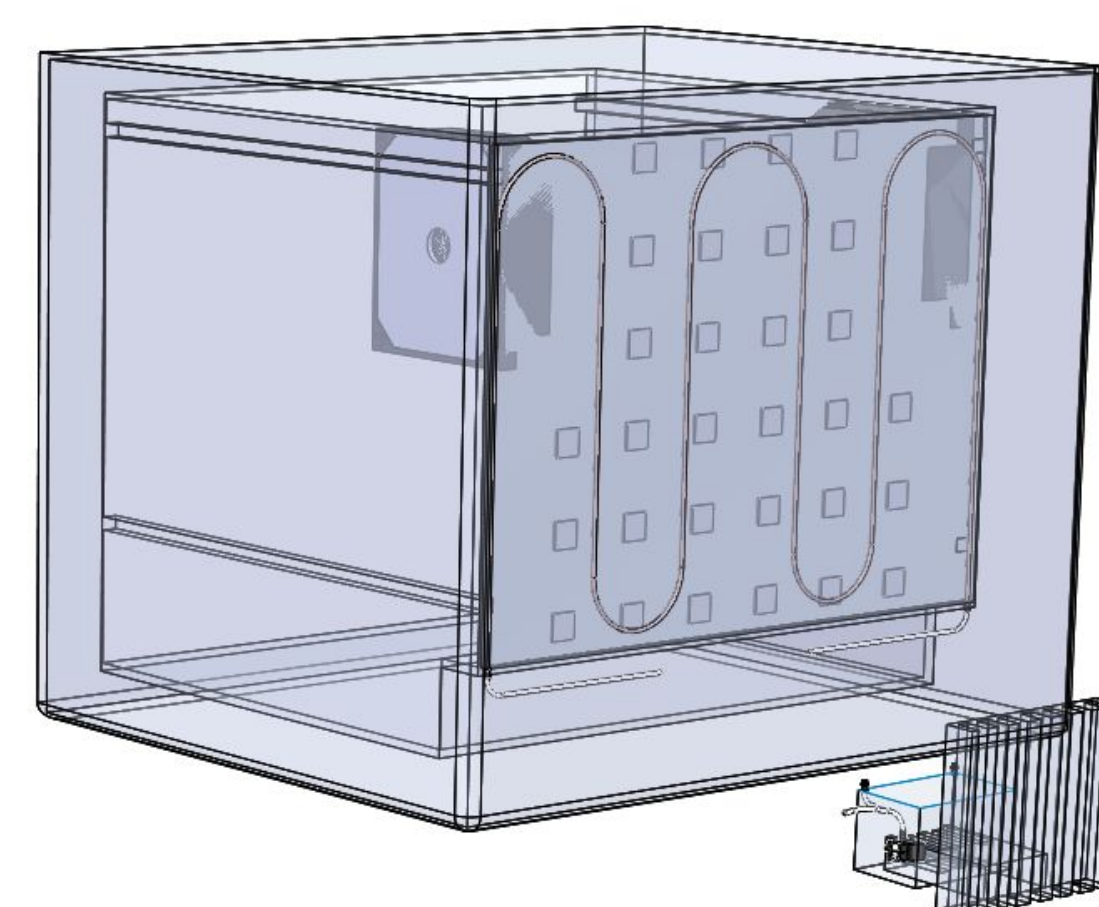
After the second prototype, the subsystems including the Peltier cooling devices, heat sinks, fans, and water pump were assembled.
